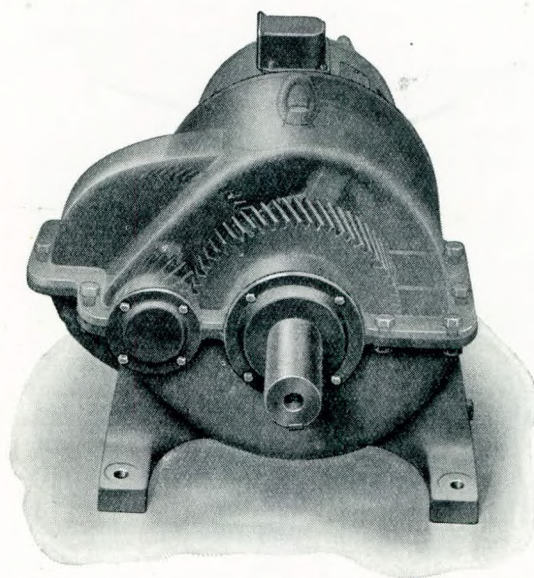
Geared motor unit with helical gears. The low speed shaft is directly in line with the rotor shaft as shown in the phantom view.
